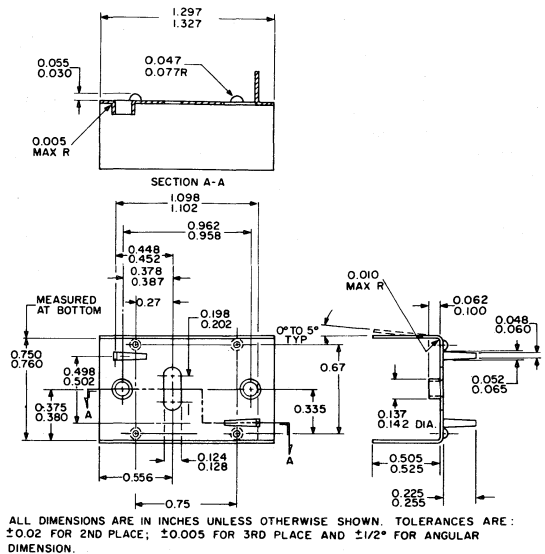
Integral heat sink used with the TO-220AA Versawatt package shown in Fig. 3.
